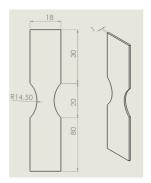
Technical drawing of the test specimens (all dimensions are in mm.)
